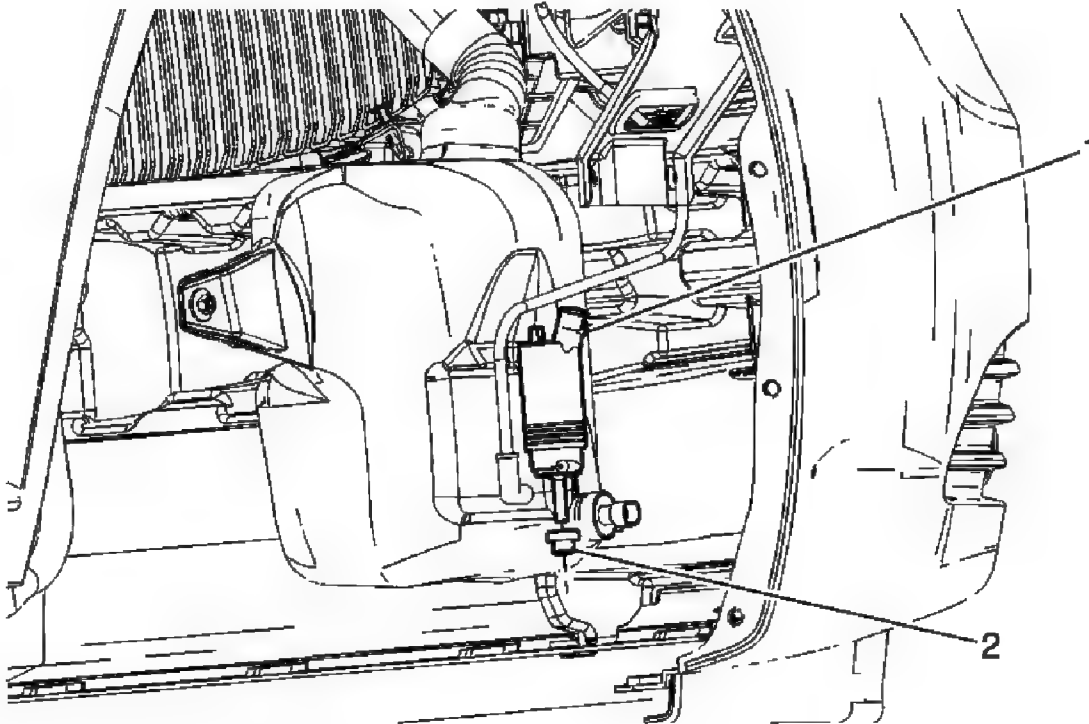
Identifying Washer Solvent Container Level Sensor
